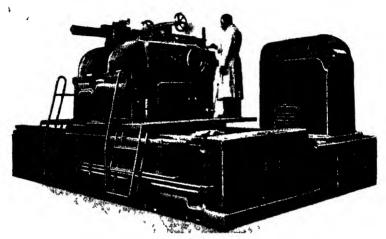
Testing the accuracy of the gear teeth after shaving.
